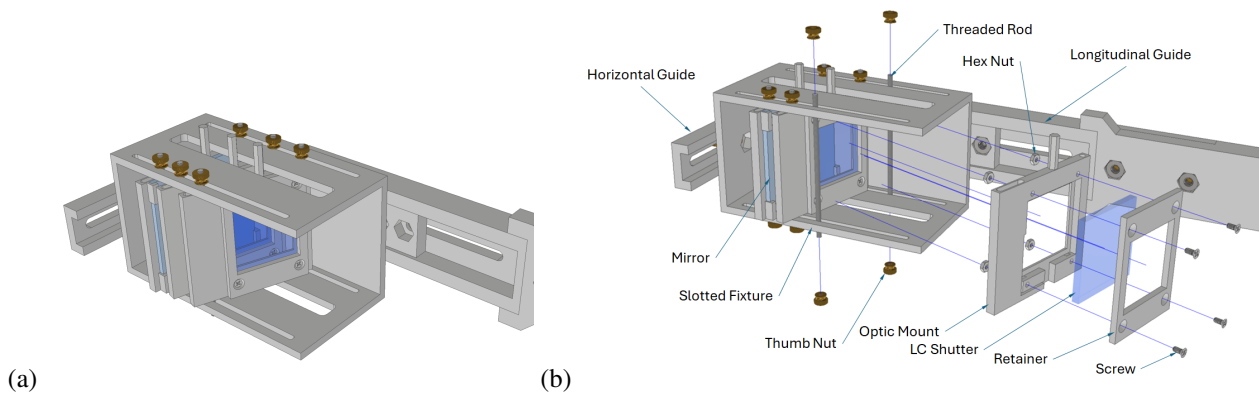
Rendering of redesigned 3D printed fixture for optical multiplexer prototype: (a) assembled view; (b) exploded view
